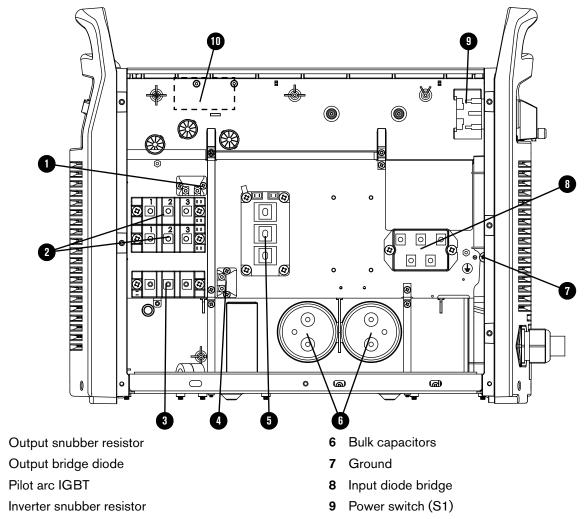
230 V - 400 V CE plasma power supply (power PCB removed)
